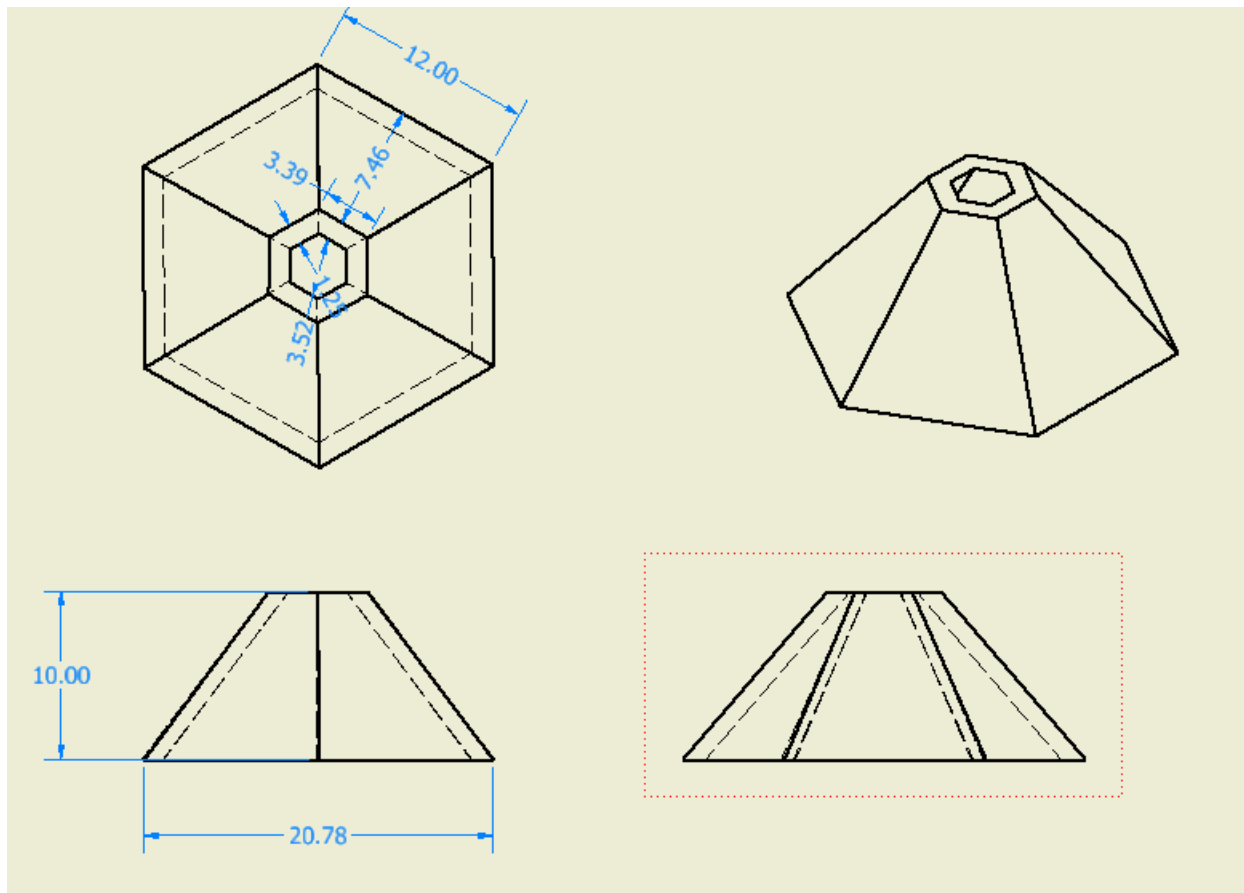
Engineering Drawing of the Base of the Pill Dispenser
